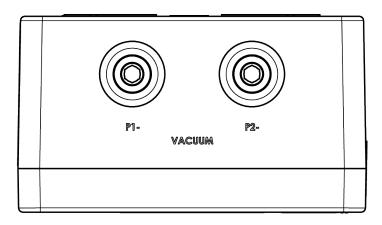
PowerPick10 Vacuum Generator - Top View
